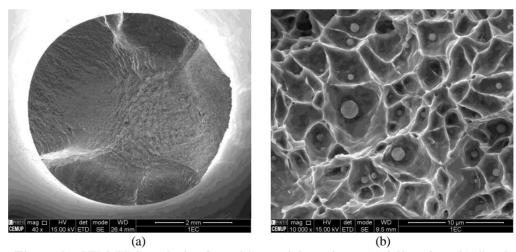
SEM-EDS analysis of a weld material specimen (a) full surface (b) dimples
